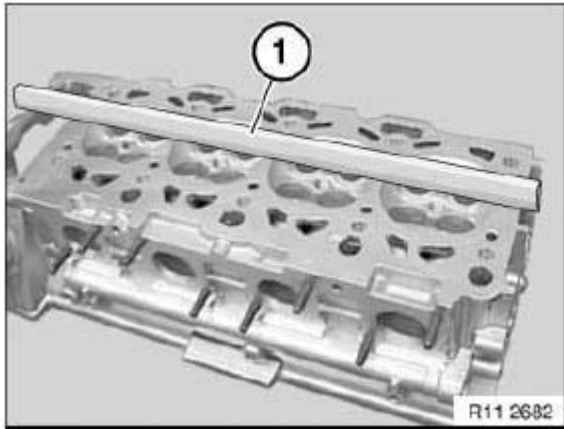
Checking Evenness Of Cylinder Head Sealing Face
